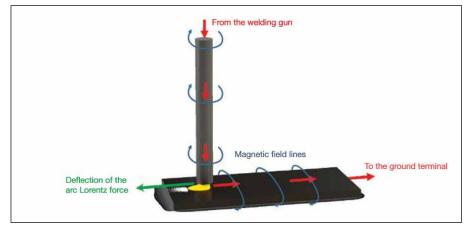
Drawn arc position (yellow area) with 2,000 A welding current and one-sided ground clamping (© Marcus Trautmann)
